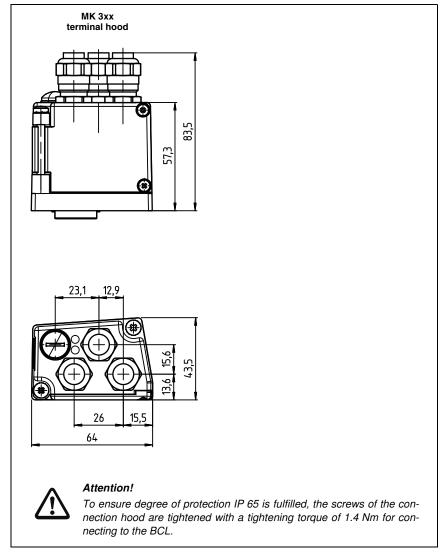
Dimensioned drawing of MK 3xx terminal hood
